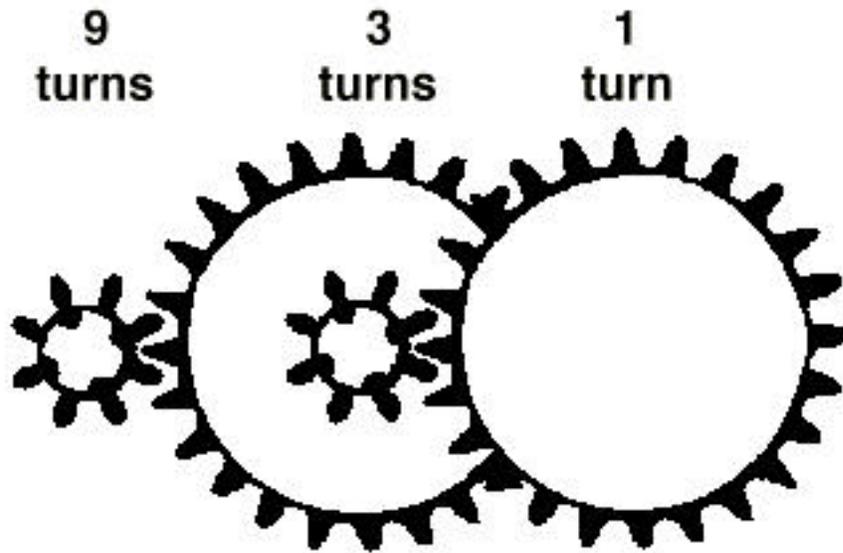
By “ganging together” – or multiplying – two 3-to-1 gear reductions, a 9-to-1 output reduction can be achieved. The key is to use intermediary shafts that hold both a large input gear (e.g. a 24-tooth) and a small output gear (e.g. an 8-tooth).
